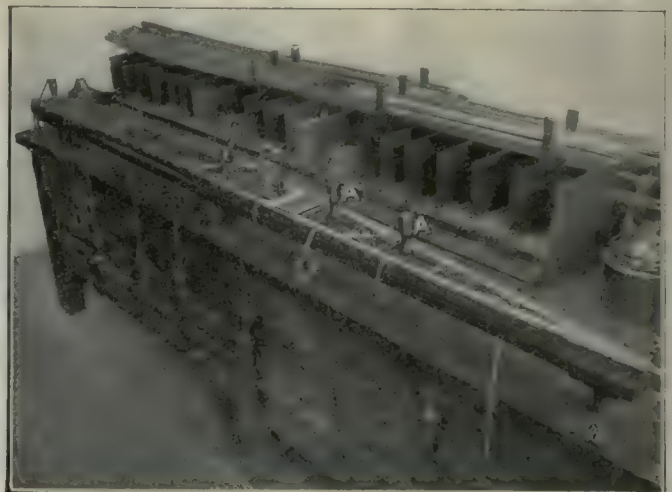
CLAMPING RIB PARTS FOR NAILING
